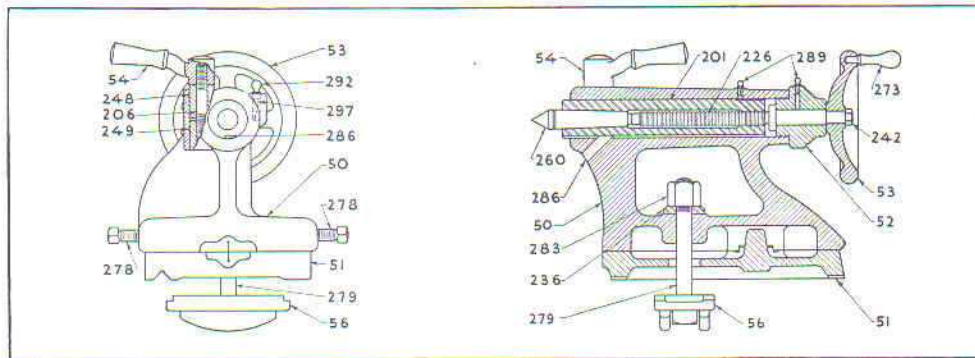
Line Drawing of Tailstock Unit Showing Position of Parts in Assembly.
